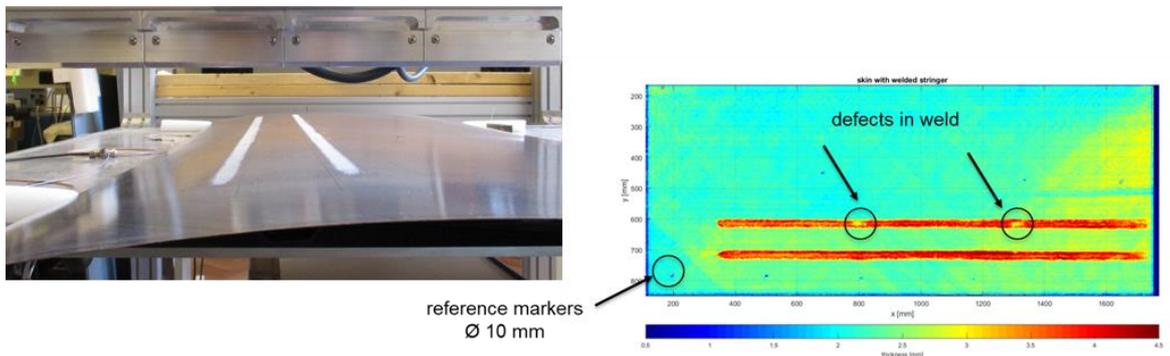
DVM results of welding inspection of two omega stringers welded on Thermoplastic (CFRP) panel. These measurements were performed under the project PENELOPE.
